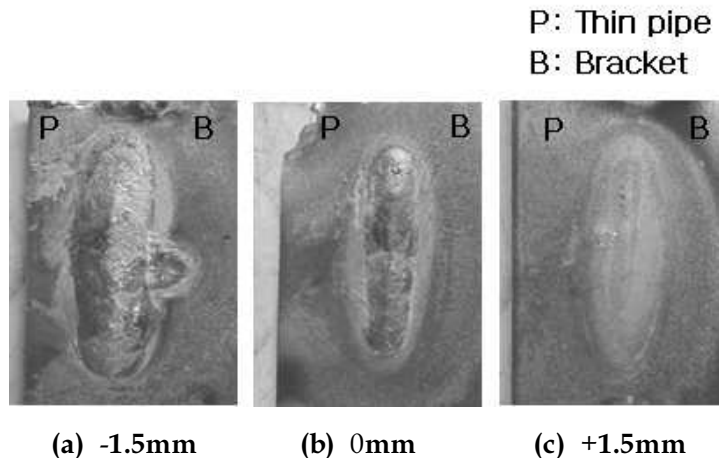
Back bead appearance for welding line (heat input: 0.15kJ/mm)
